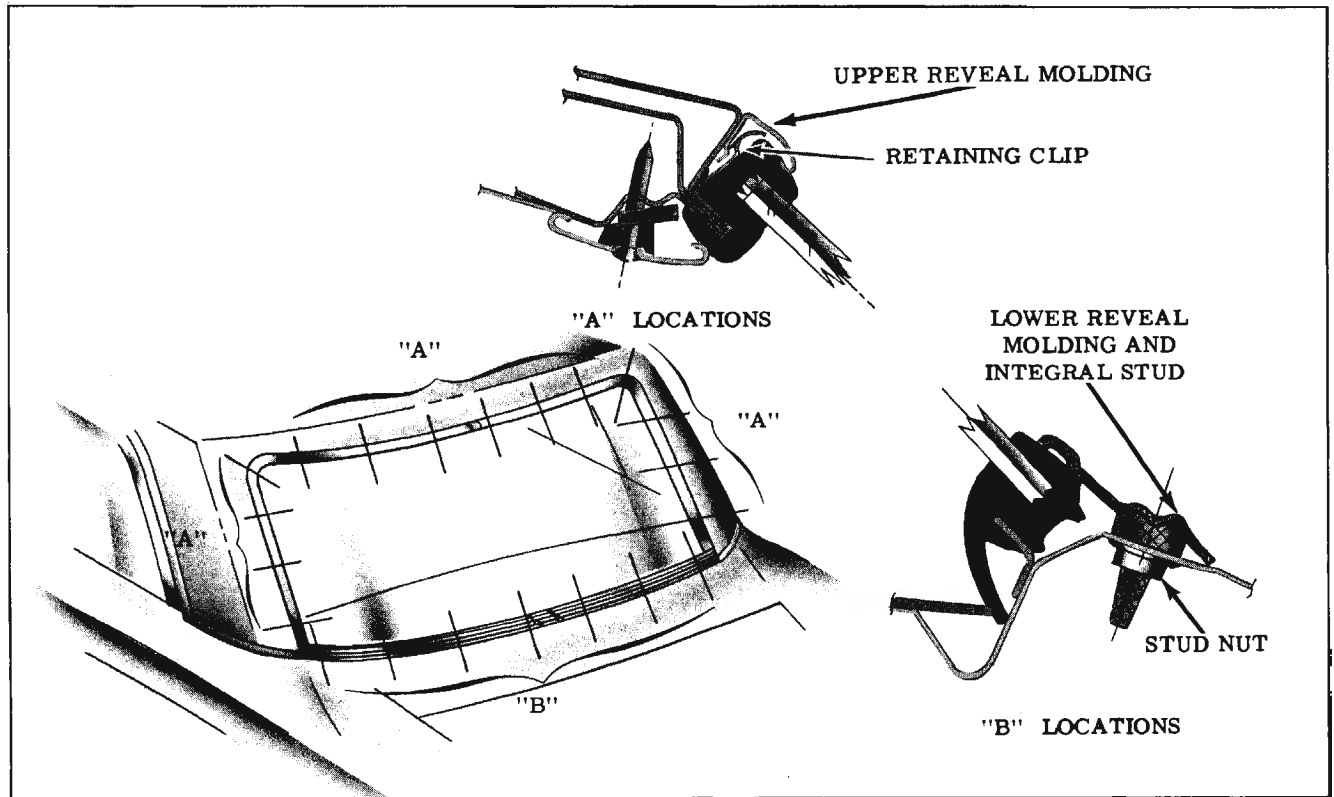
Back Window Reveal Moldings (17 Styles)
